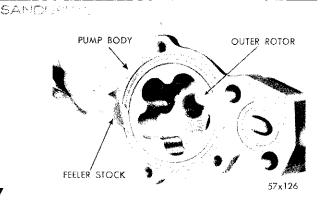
Measuring Clearance between Outer Rotor and Oil Pump Body
